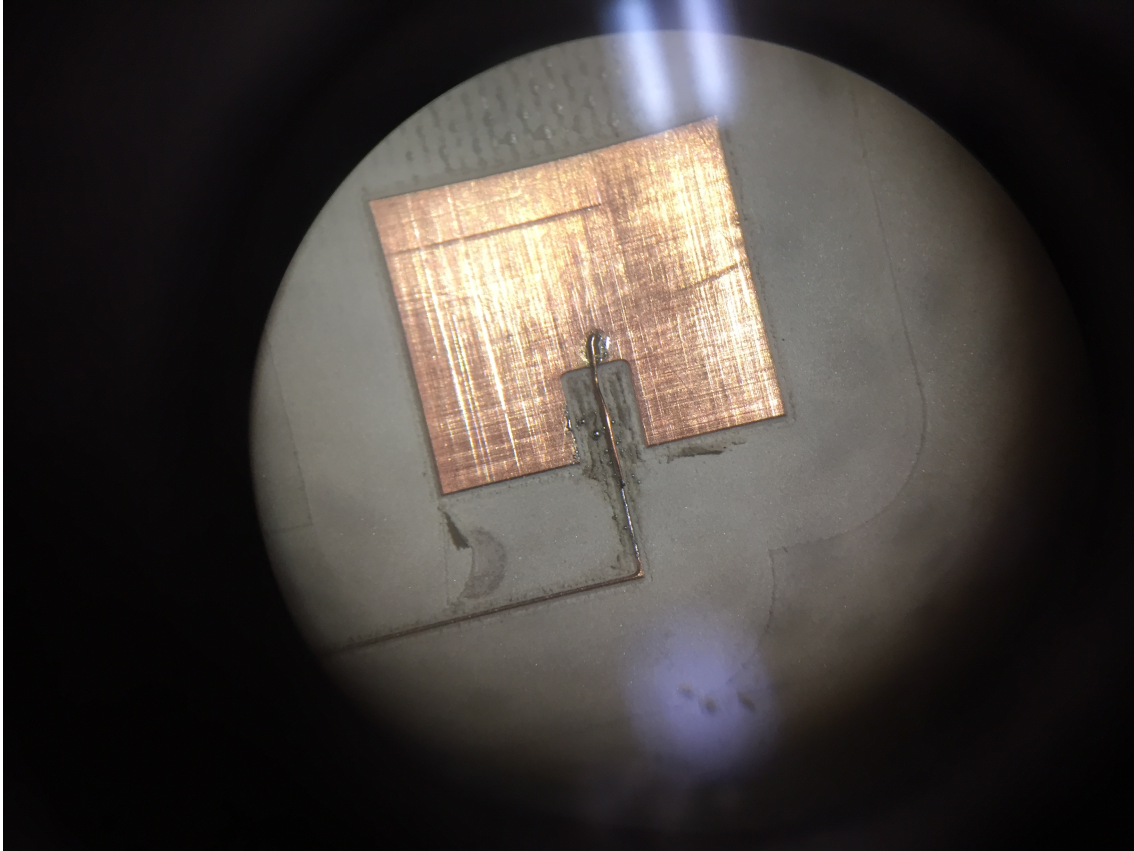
During fabrication of 4-element patch array, several of the 100ohm (7 mil) traces were severed during the milling process. These were fixed by using a single strand of copper wire from a solder wicking braid.
